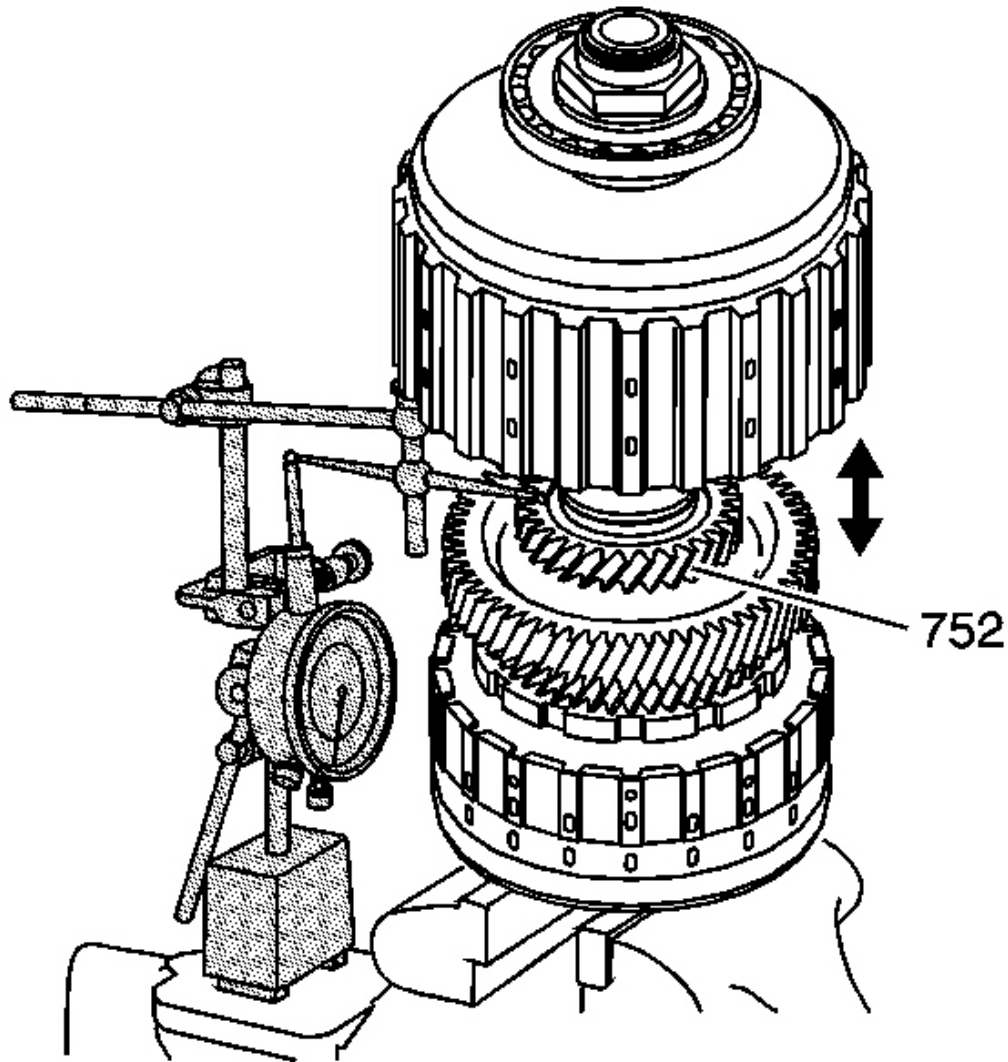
Measuring The Axial Clearance For The 1st Drive Gear
